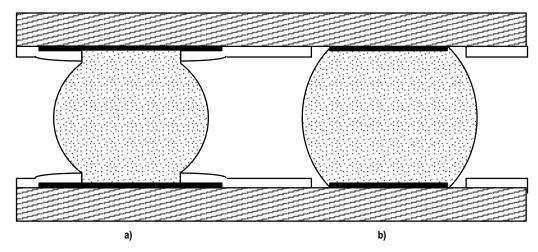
Comparison of PBGA Solder Joints with: a) soldermask-defined pad and b) conventional non-soldermask defined pad. Note the greater volume of solder and greater effective joint diameter for the non-soldermask defined pad to achieve the same stand-off.
